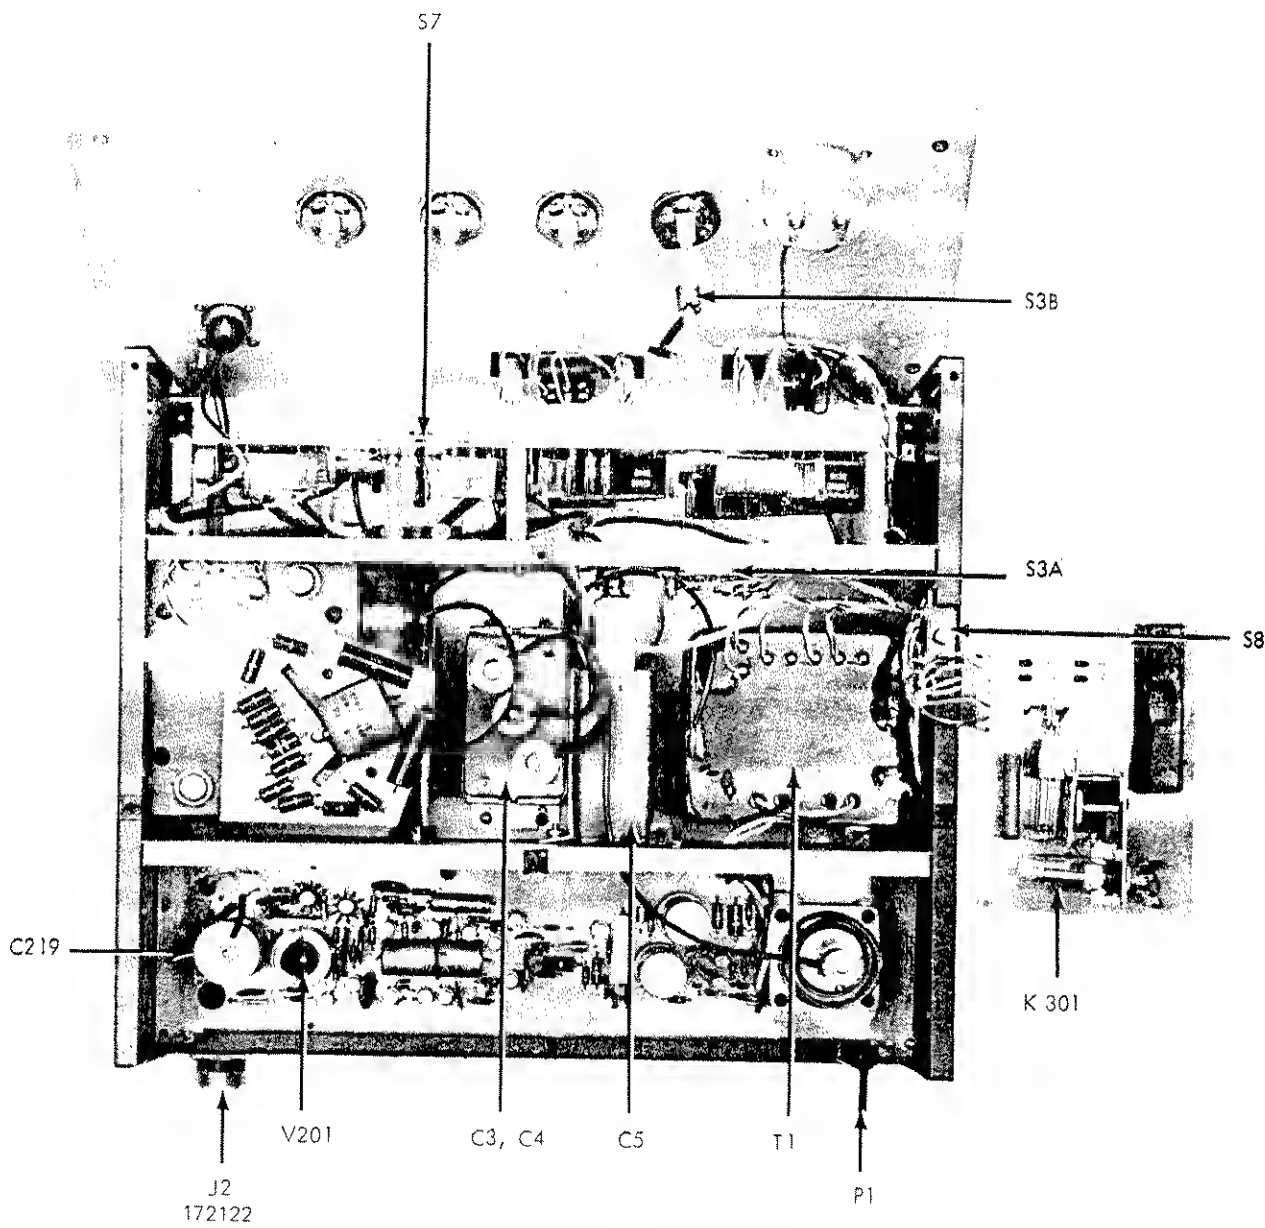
FINAL ASSEMBLY (Sheet 2 of 2)
